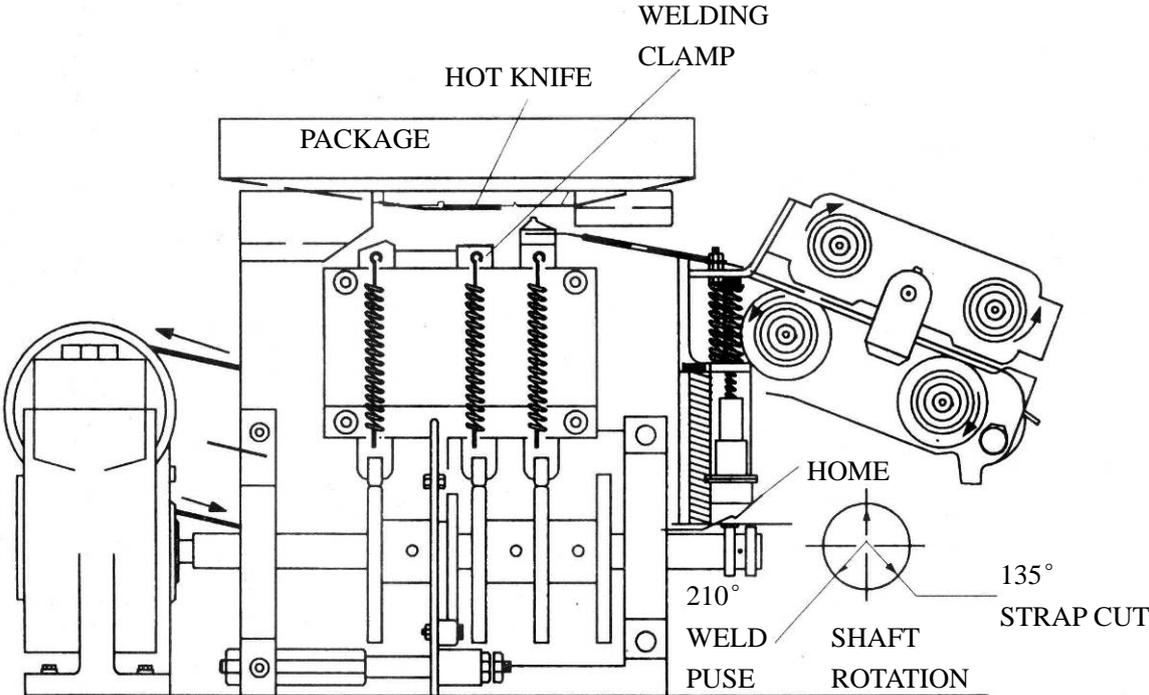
STRAP IS CUT & WELD IS MADE
